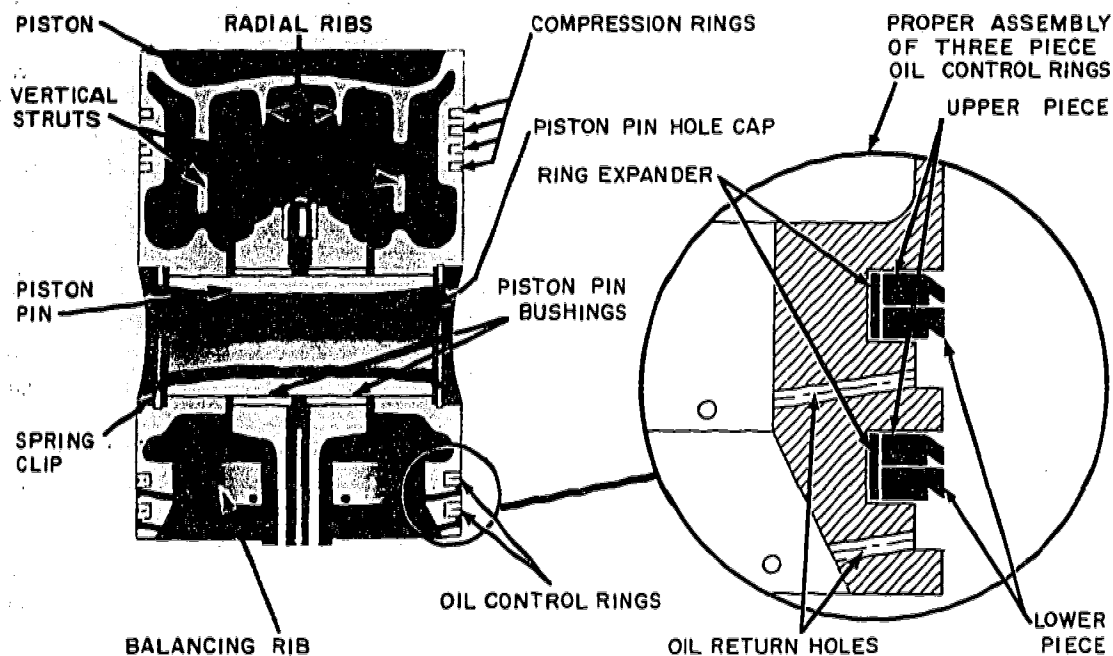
Piston assembly of General Motors series 71 diesel engine.
